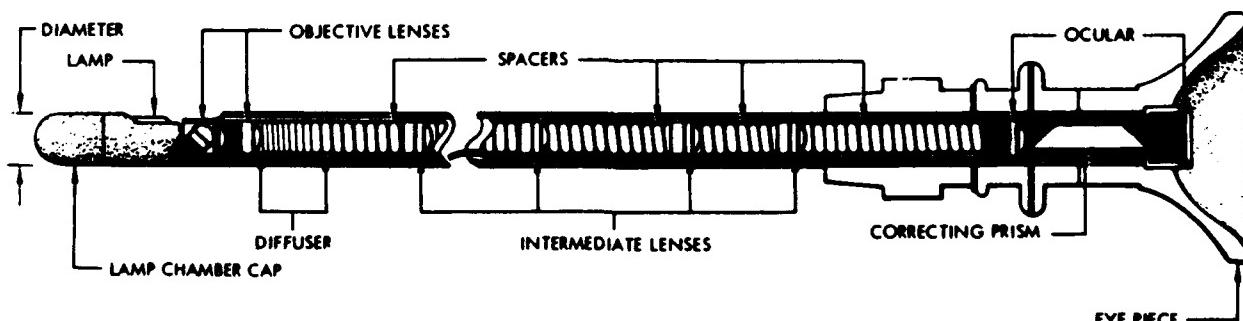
TYPICAL BORESCOPE CONSTRUCTION
